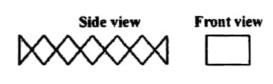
shows a model of a buffer which can be used in the cart. It is light and able to retract.
